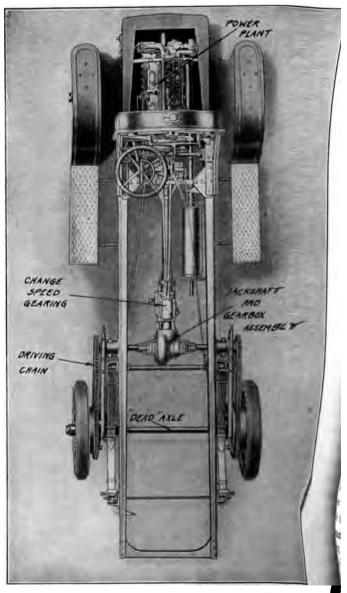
Plan View of Typical Chain Driven Motor Truck Change
